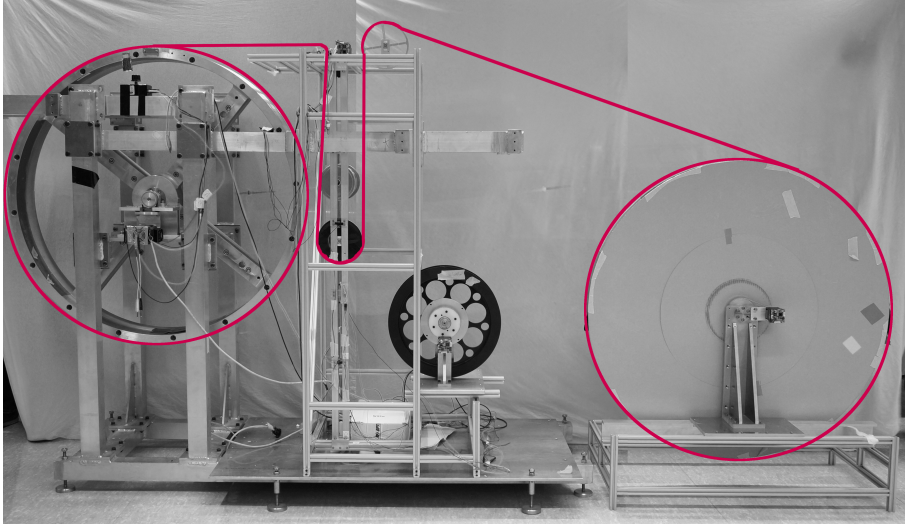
Prototype fibre winding machine. The fibre is wound from right to left and is provided by a feeding spool. A constant tension is given by a loose spool with a certain weight. A small spool gives the correct position on the winding wheel.
